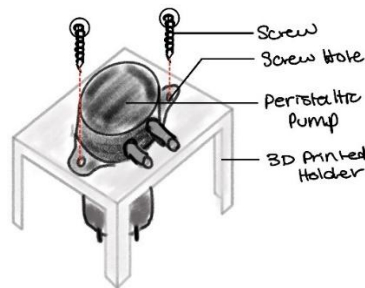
Example of 3D printed peristaltic pump mount for second prototype with screw holes for secure fit. To be placed inside of housing found in Figure 14.
